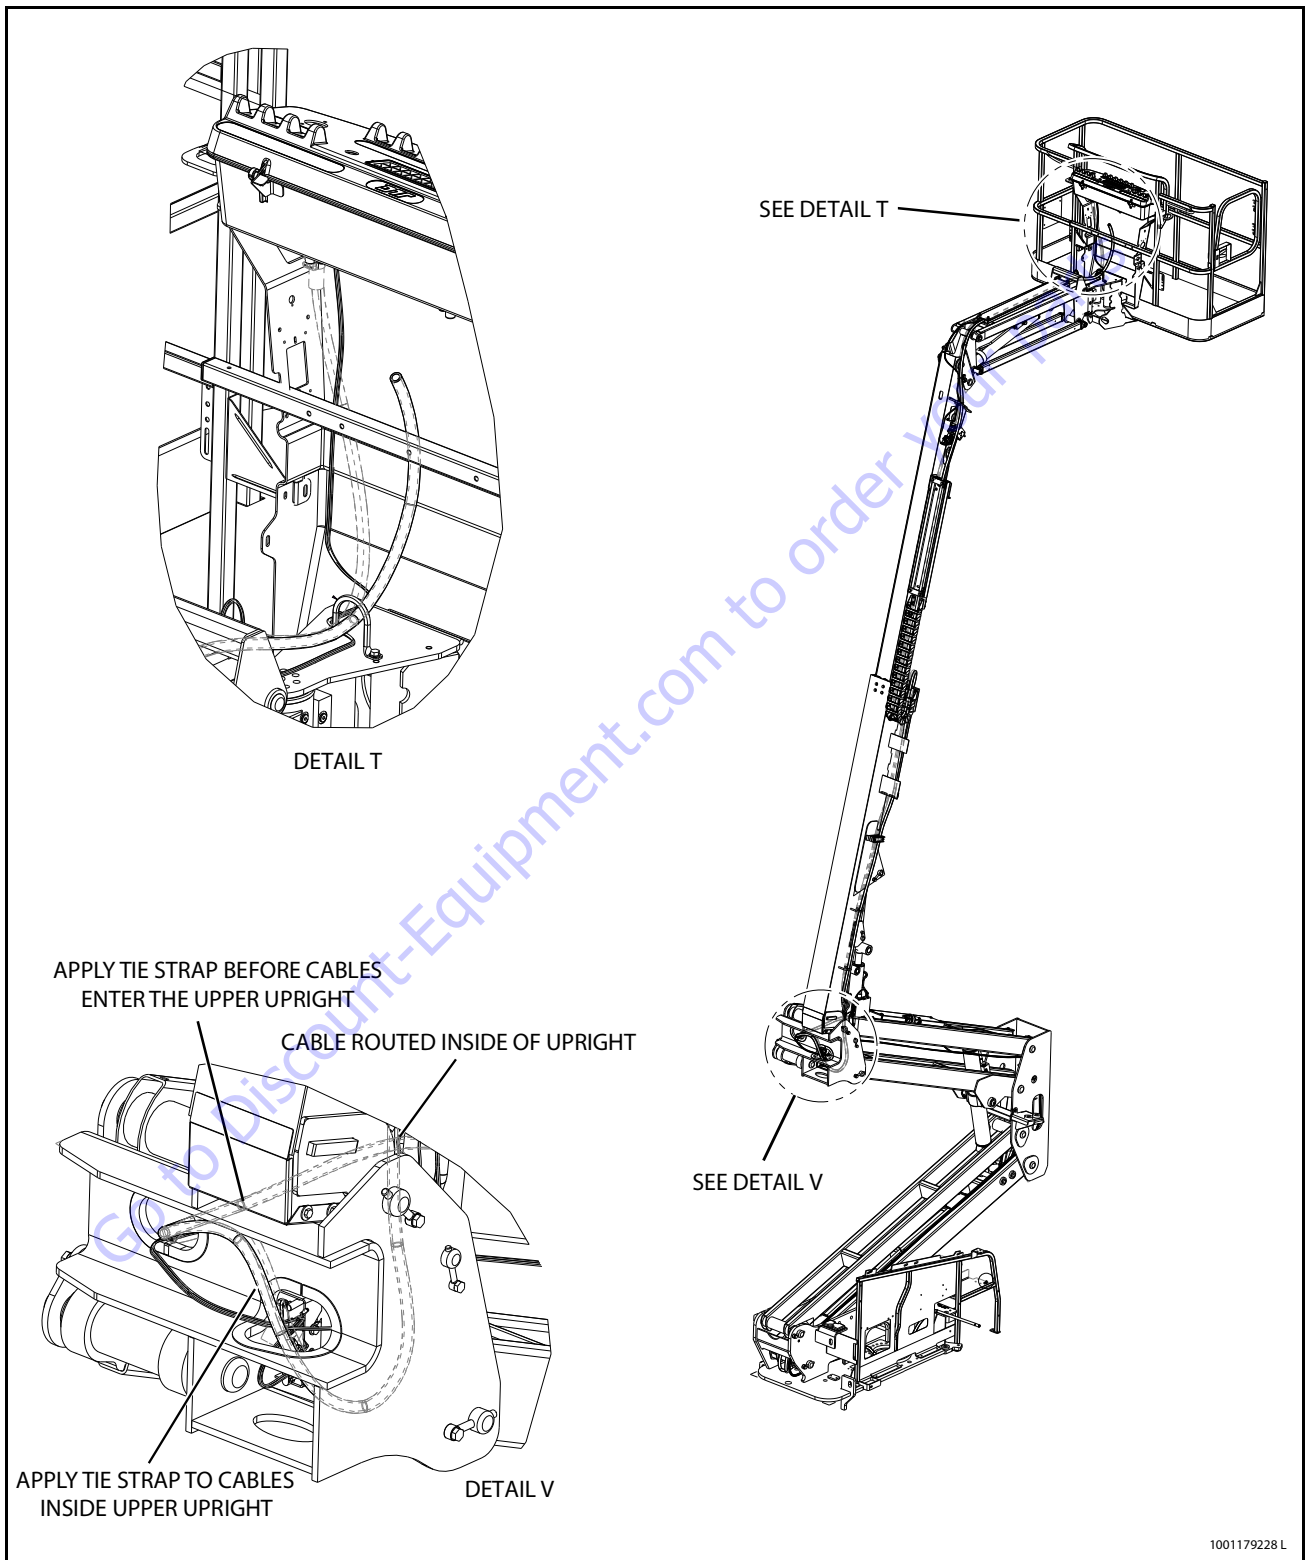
Cables and Clamps Installation - Sheet 7 of 8
